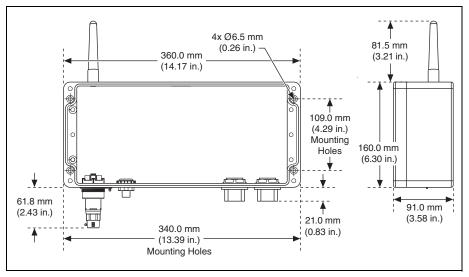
NI 9925 Dimensions and Mounting Hole Locations
